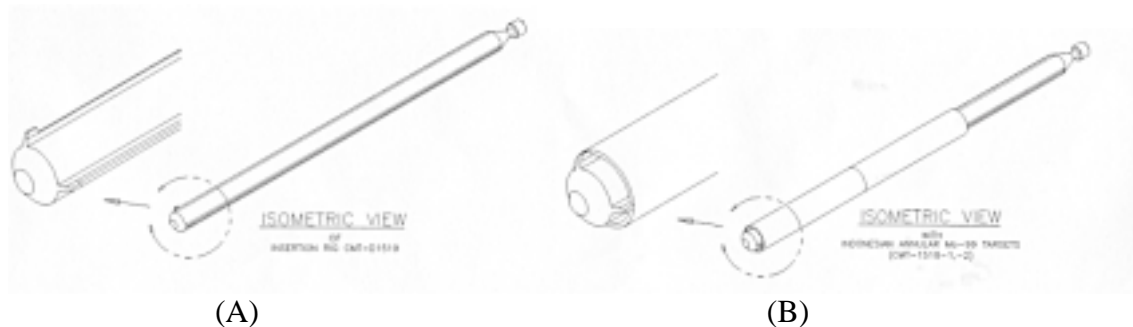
(A) Target Insertion Rig, (B) Target Insertion Rig with Target Showing Cooling Channel on Inside of Target
